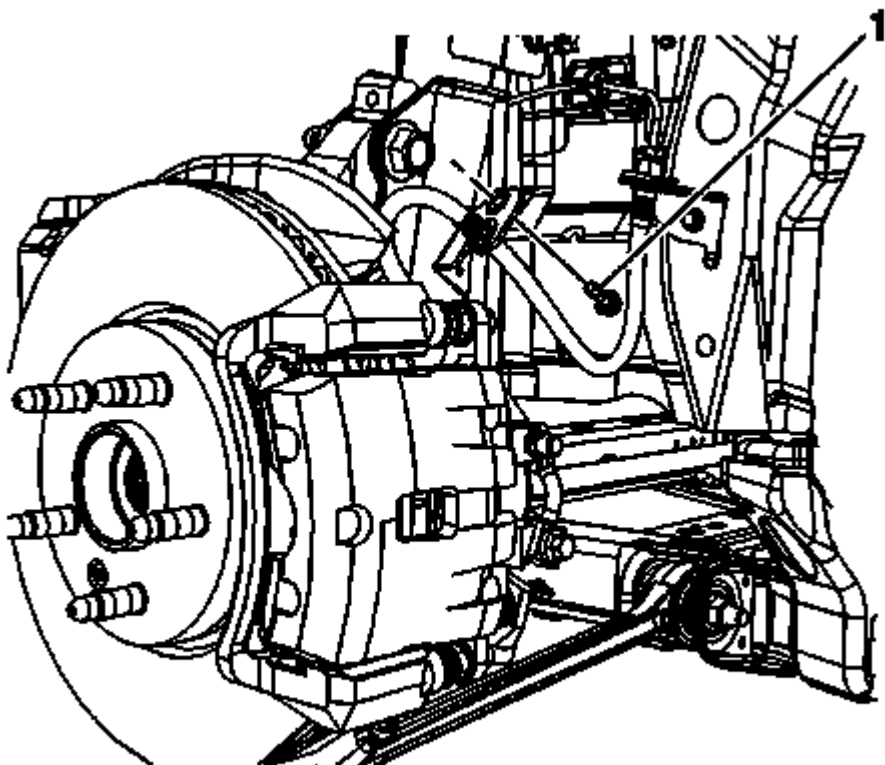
Strut Assembly Brake Hose Bracket Bolt
